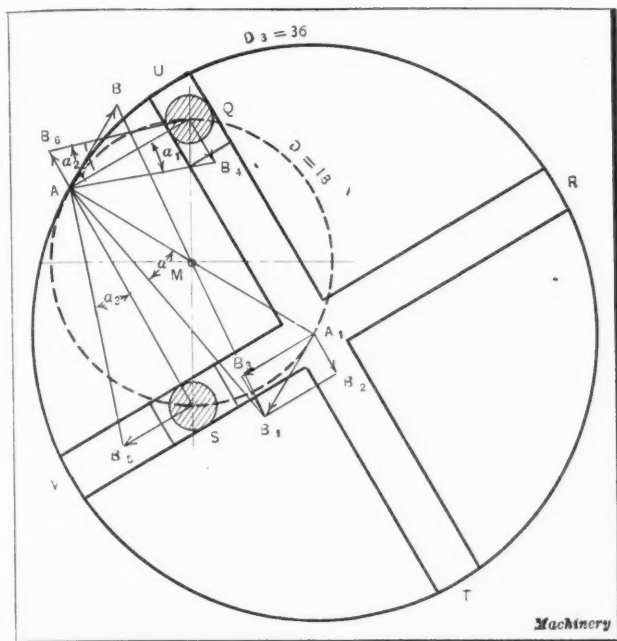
Oldham Coupling arranged as a Planetary Gear Mechanism
